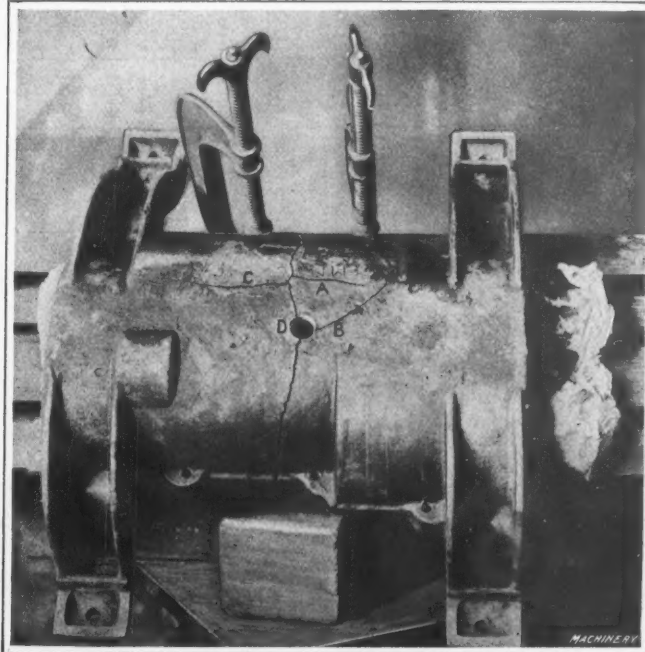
Method of saving Bearings and aligning Parts of Broken Case
